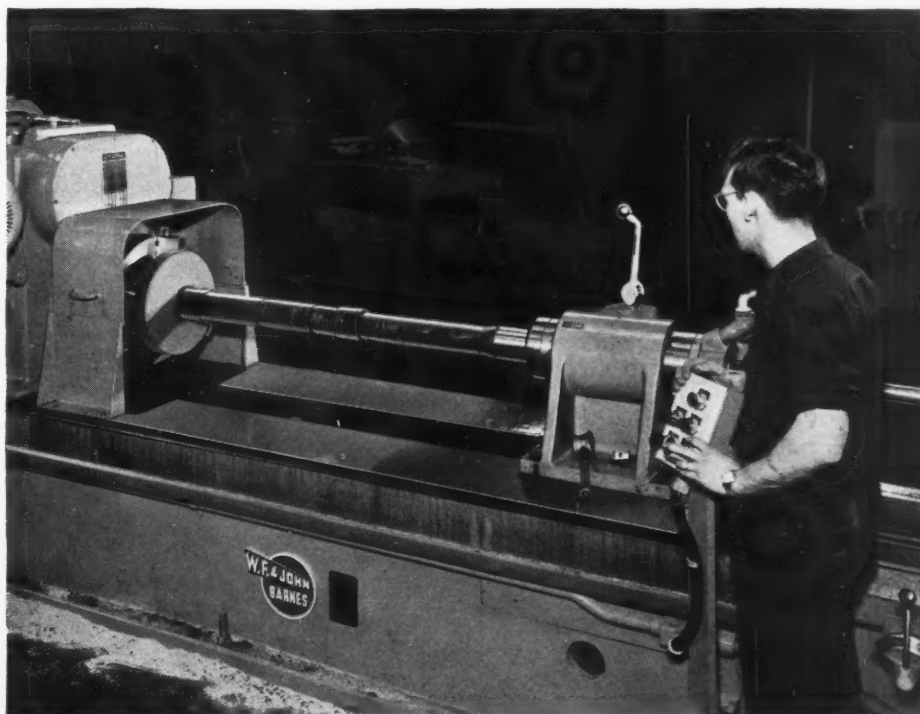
Carbide cutter blades held in a spade-drill stem are employed to cut a bore through the turbine wheel shaft.
